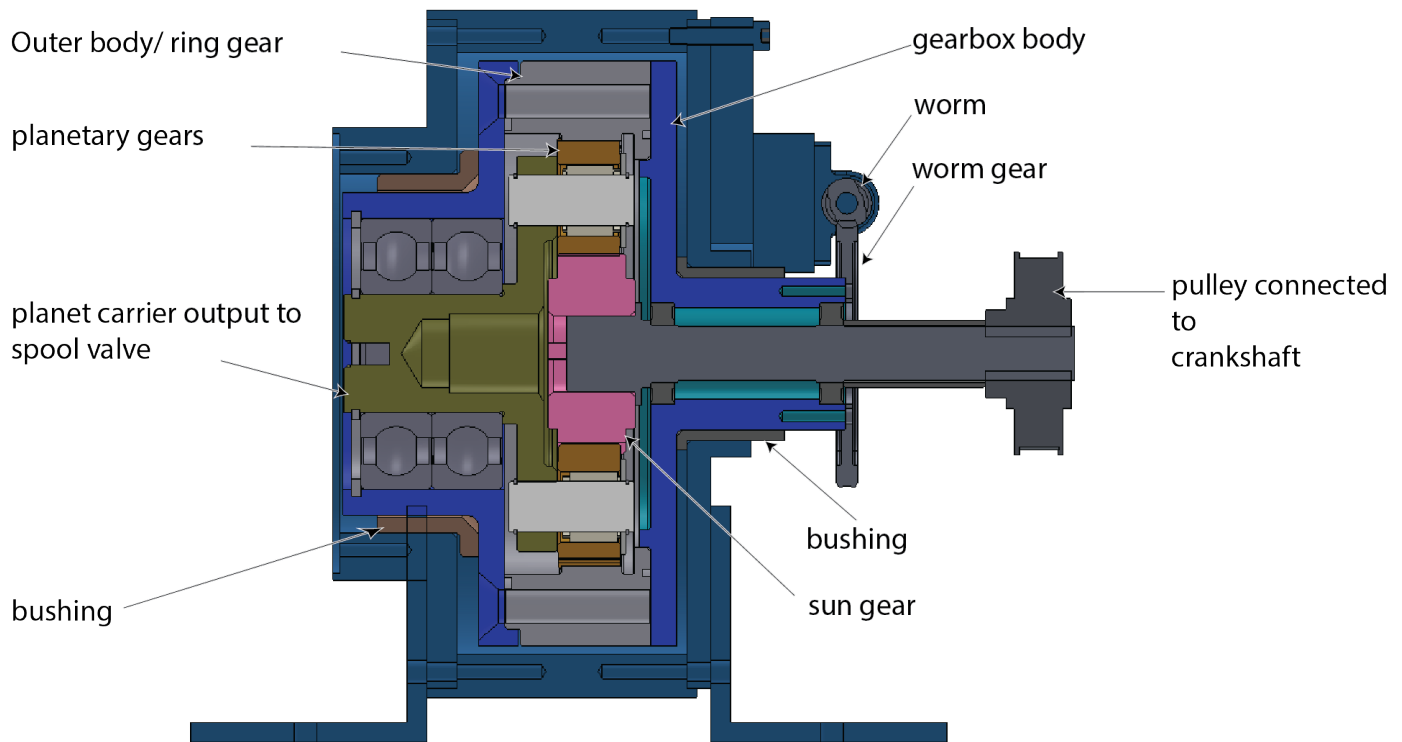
Section view of phase shifter showing connection from pulley input to sun gear and worm drive to ring gear
